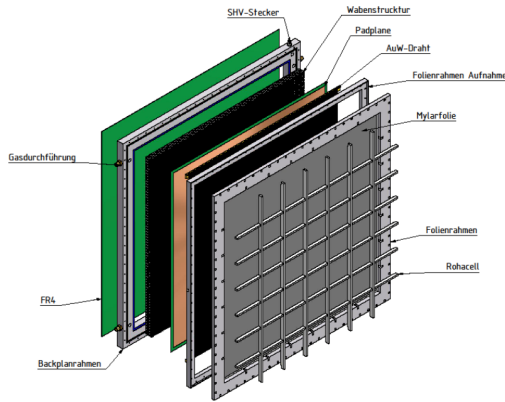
Technical drawing of a full-size TRD-prototype without drift region
